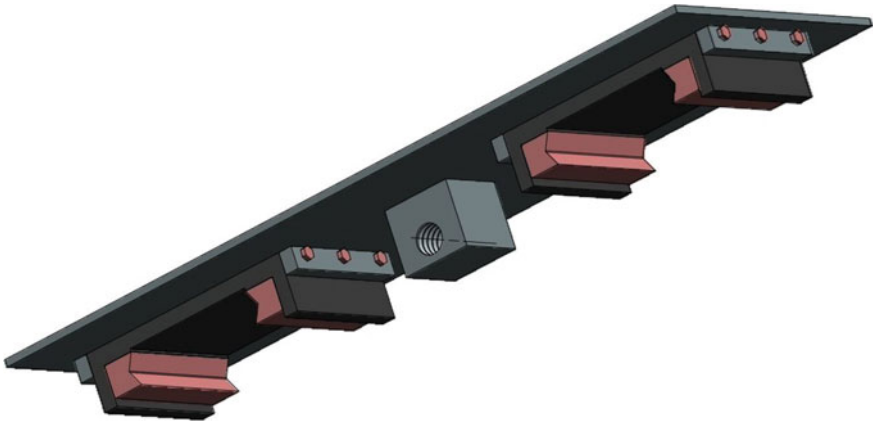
Isometric view of base of welding torch assembly with M slides
